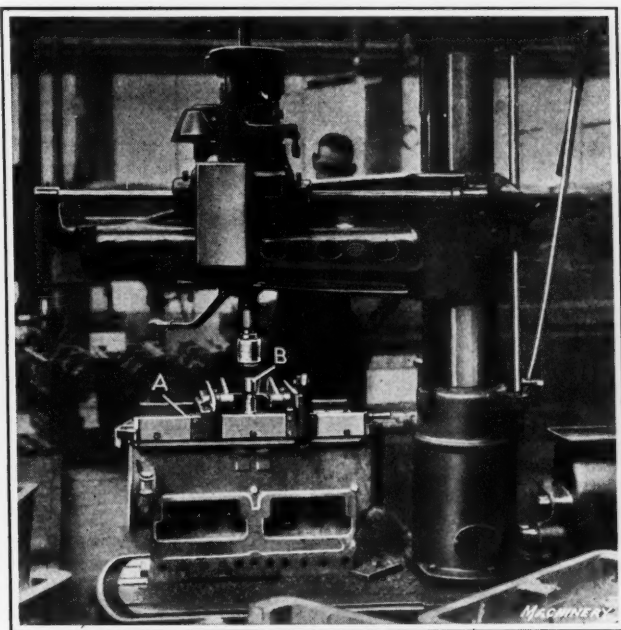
Wiard Chuck in Use on Radial Drilling Machine to facilitate the Handling of a Drill Jig
